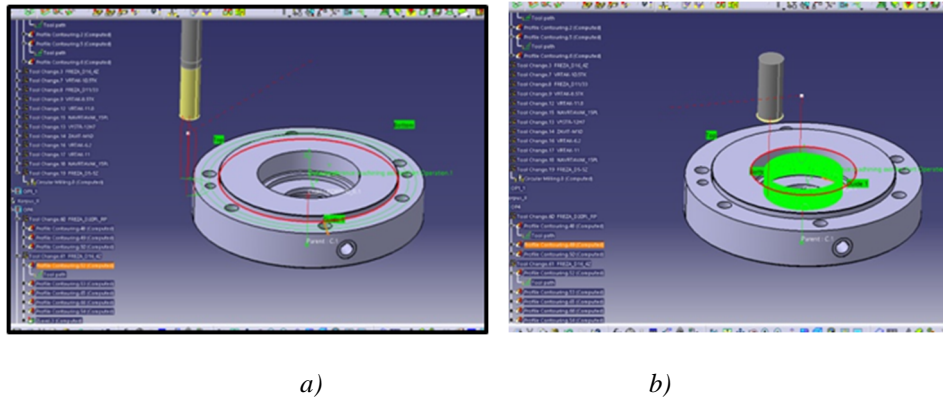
First side of CAD model (a), Second side of CAD model (b)
